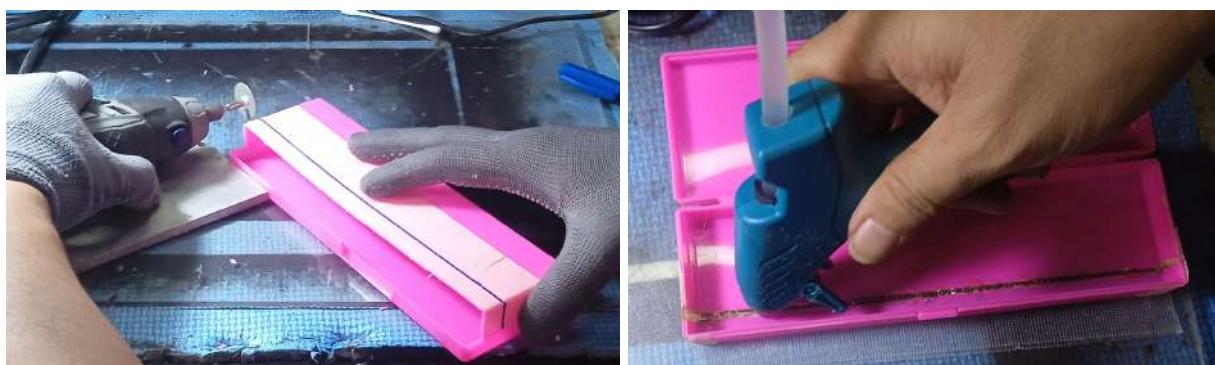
Cutting and Gluing of Reduced Pencil Case.
